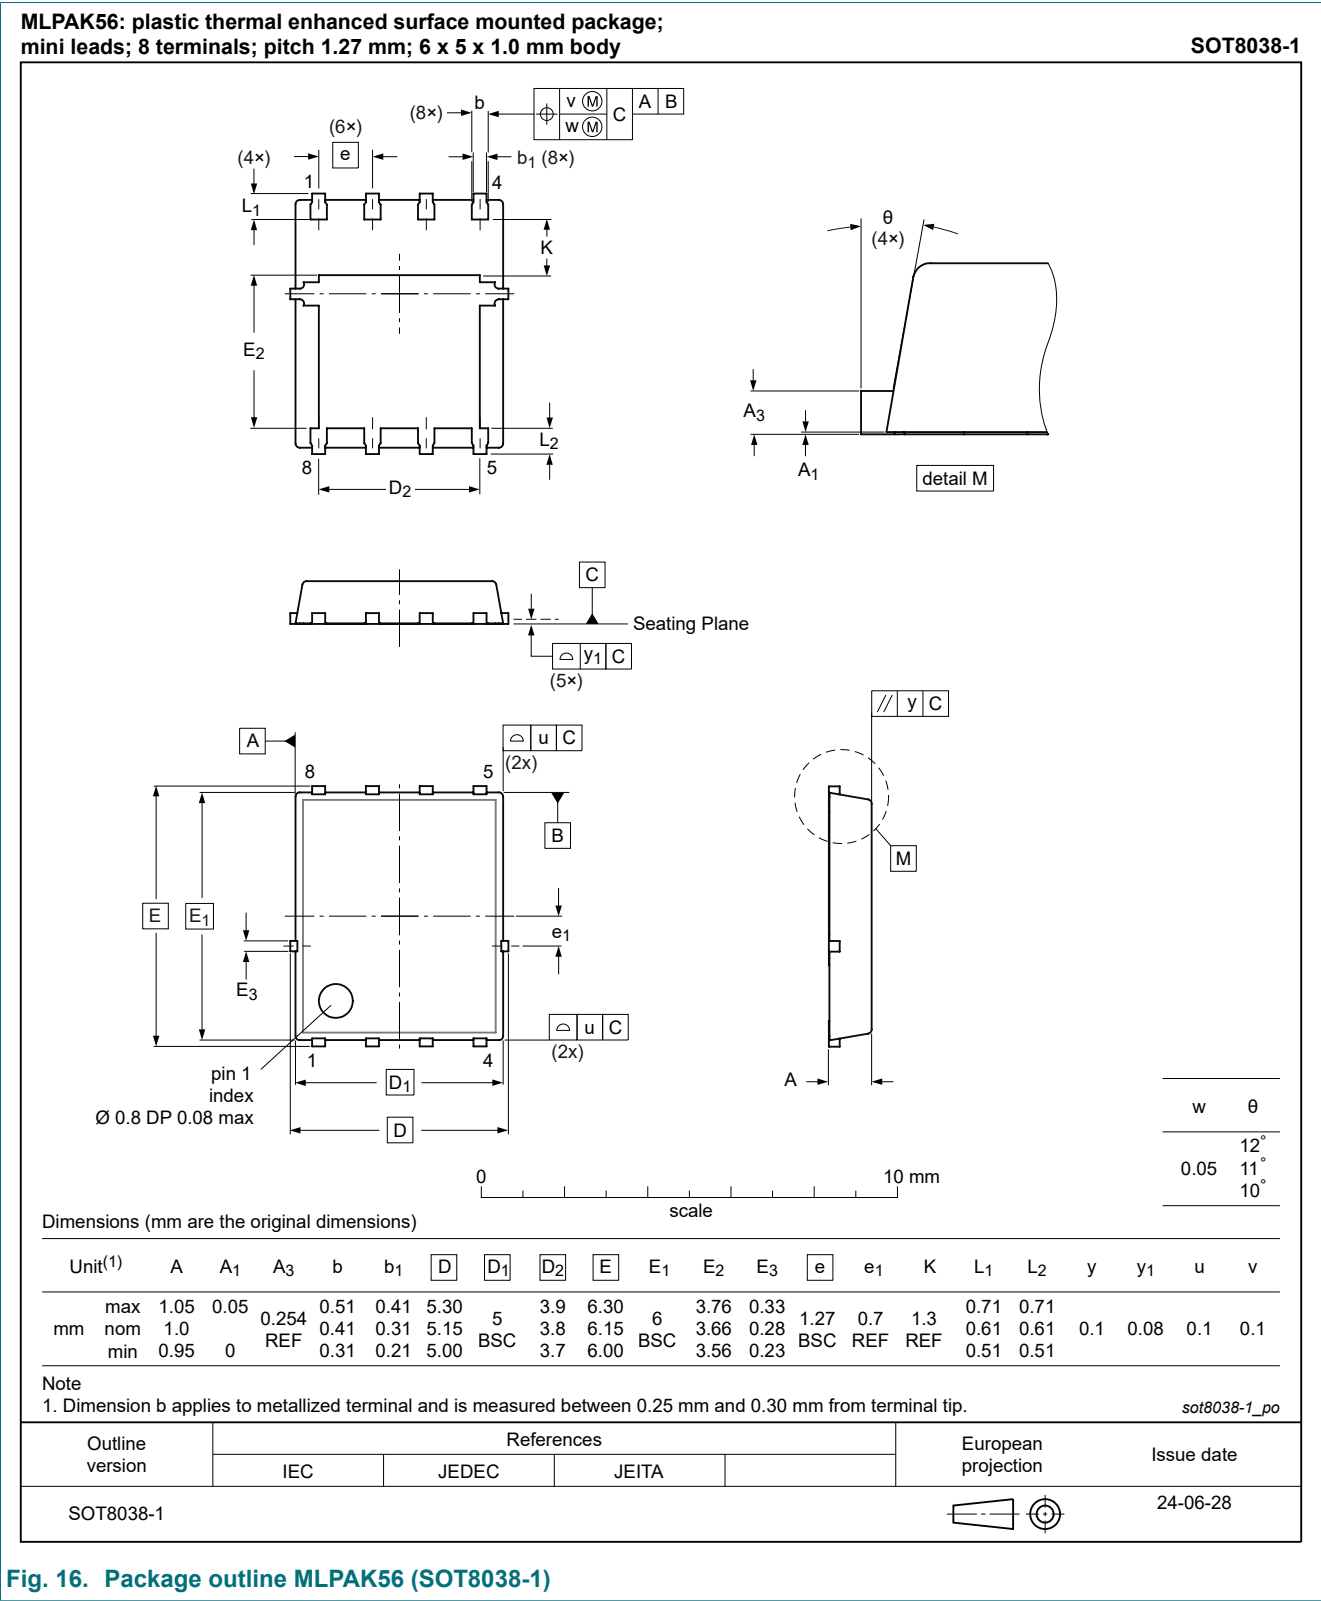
Package outline MLPAK56 (SOT8038-1)
